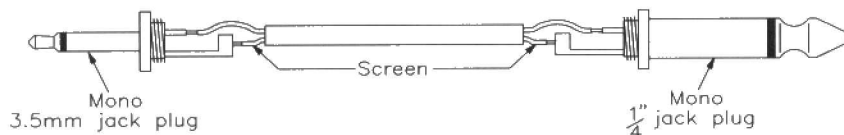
Custom 1/4in. jack plug to 3.5mm jack plug adaptor lead.
